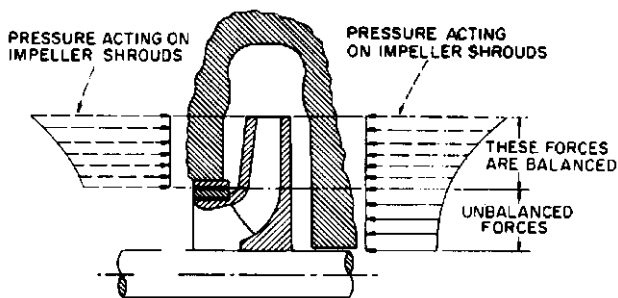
Pressure distribution on the front and back shrouds of the single-suction impeller with a shaft through the impeller eye
